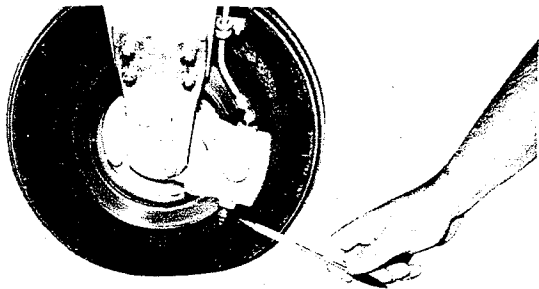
BRAKE ASSEMBLY BLEEDER VALVE
